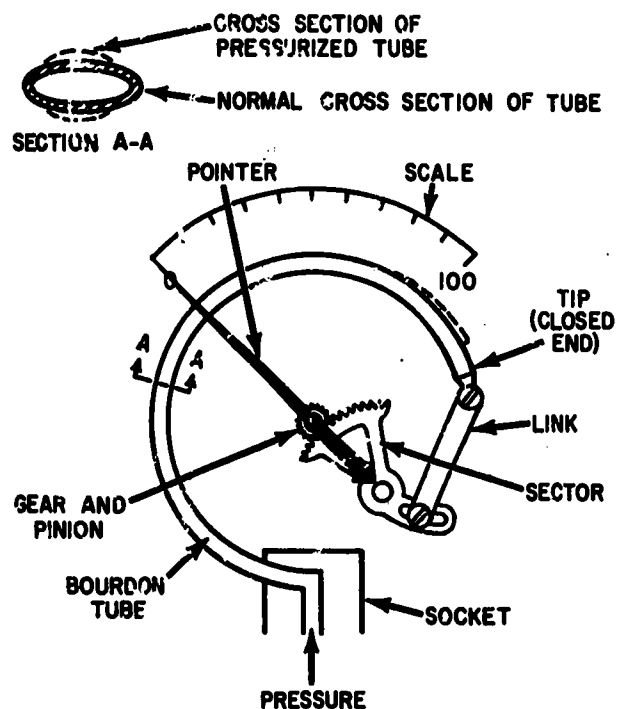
Essential parts of Bourdon tube pressure gage.
